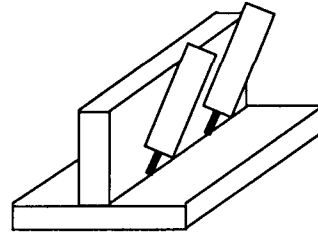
Schematic of tandem welding in the fillet welding
